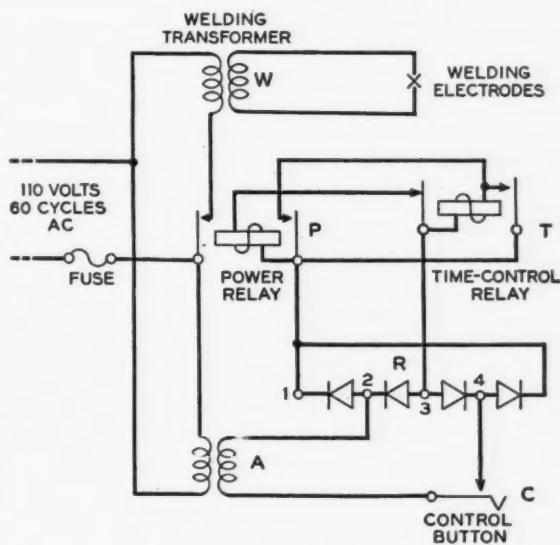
Pressing the control button C completes a circuit through the auxiliary transformer A and the rectifier R and operates the power relay P, which closes the circuit through the welding transformer W. The delayed-action relay T determines the welding time
